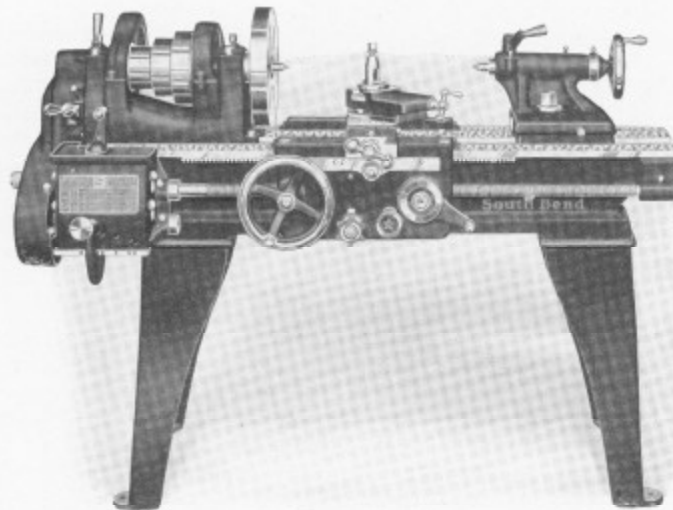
11-inch Quick Change, Back Geared, Screw Cutting Lathe
